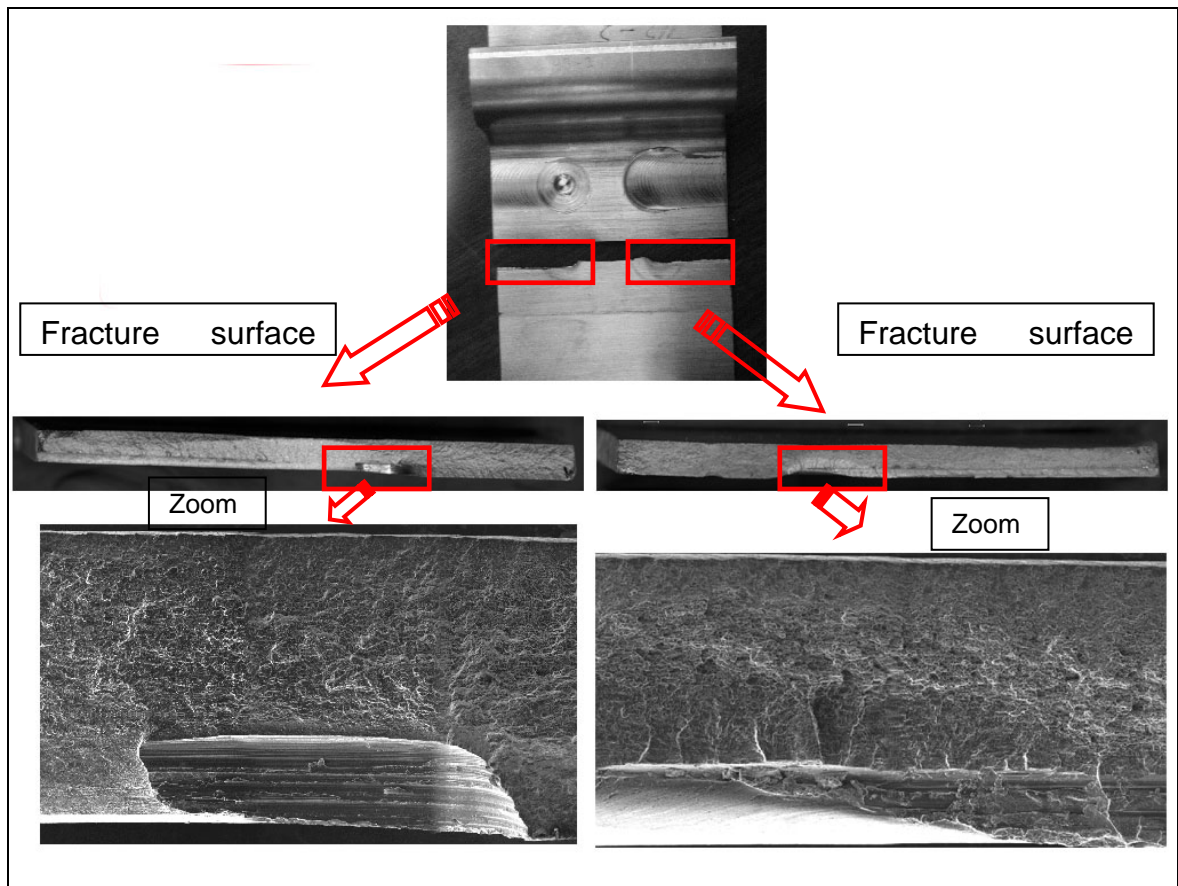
The SEM pictures of a DP (Type I) specimen with tool pin hole tested at 20 ksi.
